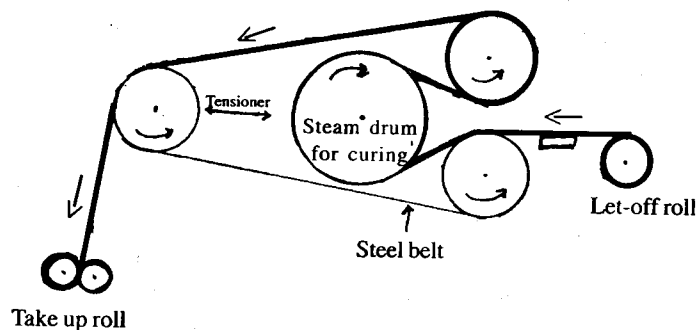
Illustrating the operation of the 'Rotocure' machine.
